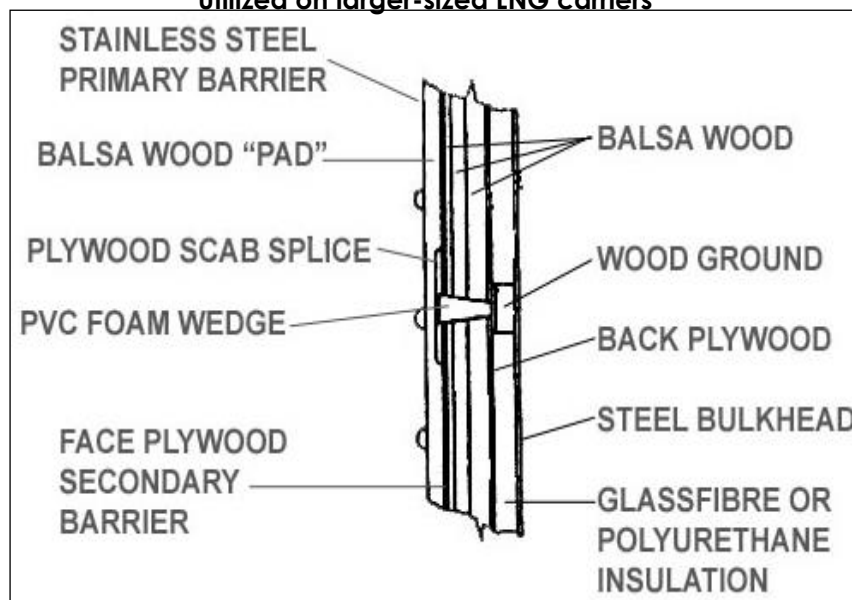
(b) Detail of the Technigaz membrane's barrier and insulation construction
